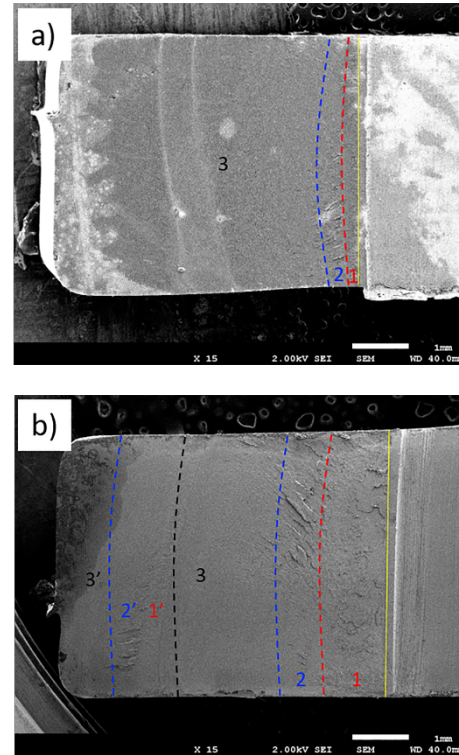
Fracture surfaces showing propagation zones generated during the fracture process: a) PLA, b) Blend.
